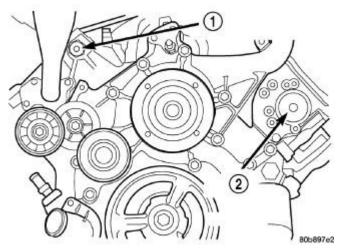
Cylinder Head Access Plugs Courtesy of CHRYSLER LLC
